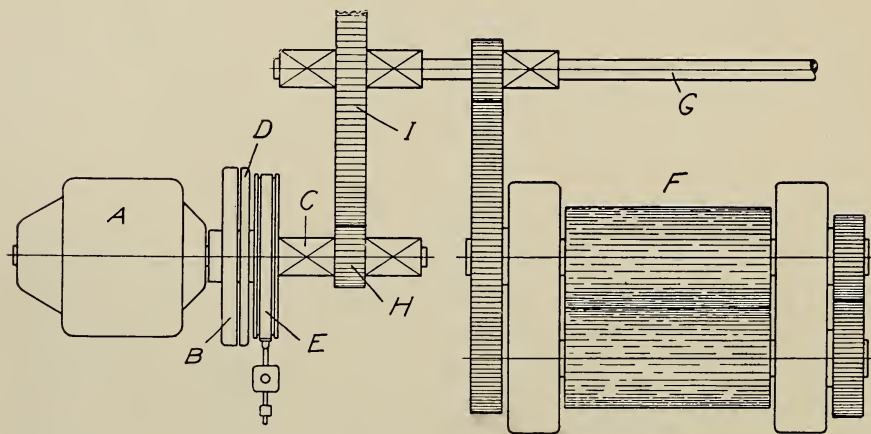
CLUTCH AND BRAKE INSTALLATION.
